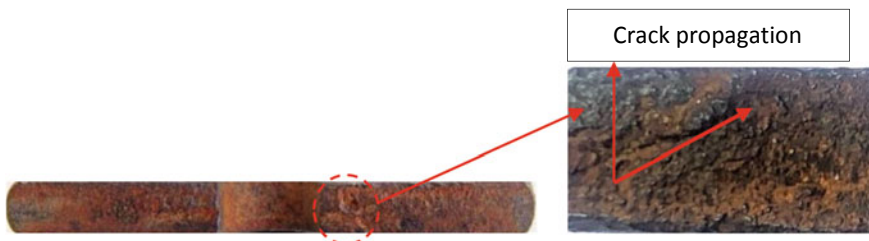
Leaf spring macrostructure, a leaf spring fracture surface, b initial crack
